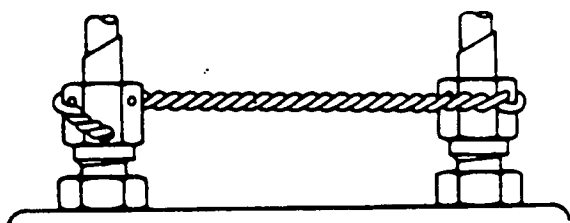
Coupling nuts attached to straight connectors shall be wired as shown where unwired fitting is an integral part of the connector.
